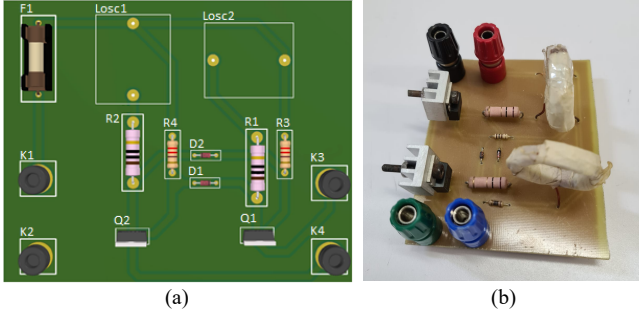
(a) PCB layout, and (b) real assembled prototype.
